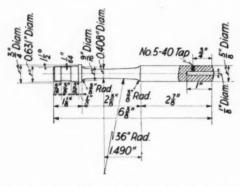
Details of Specimens Used in High-Temperature Fatigue Machines.
